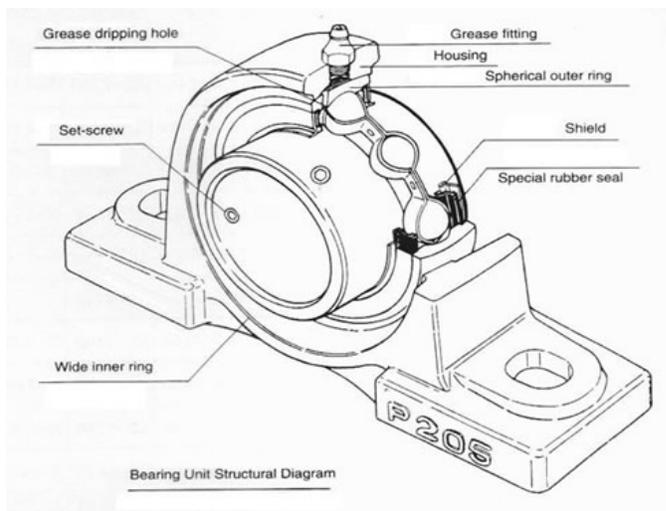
A ball bearing pillow block (Image Credit: Sup Bearing)
